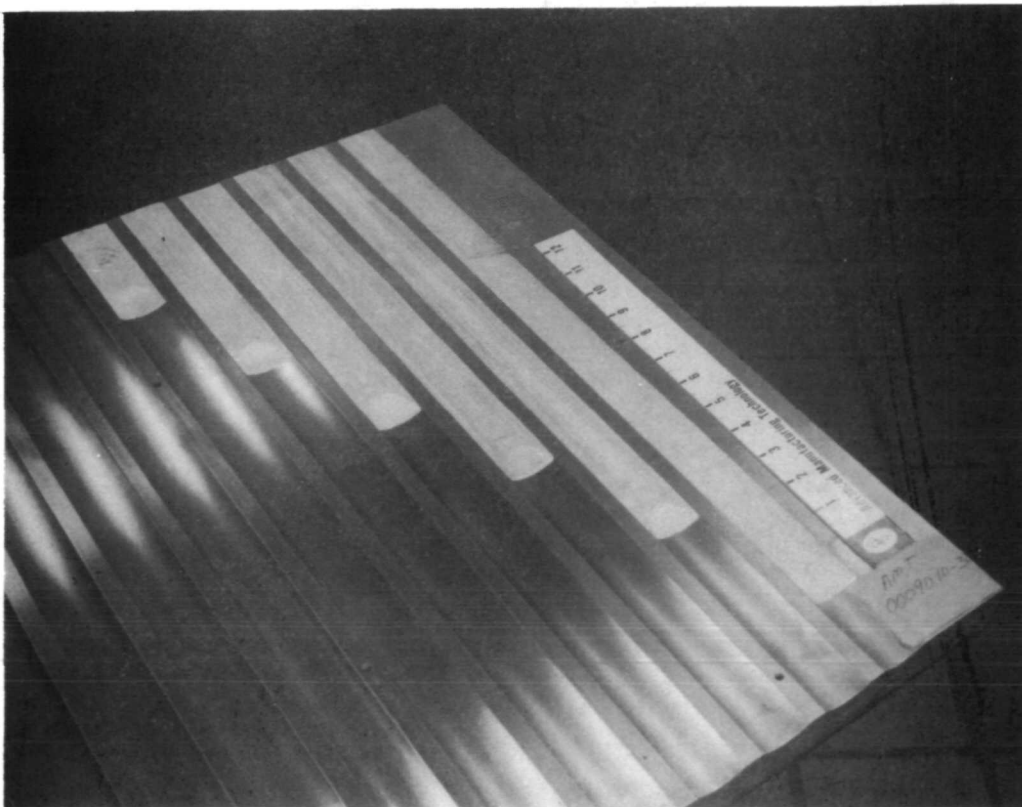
Heat Shield Forming Die with Fiberglass Inserts
